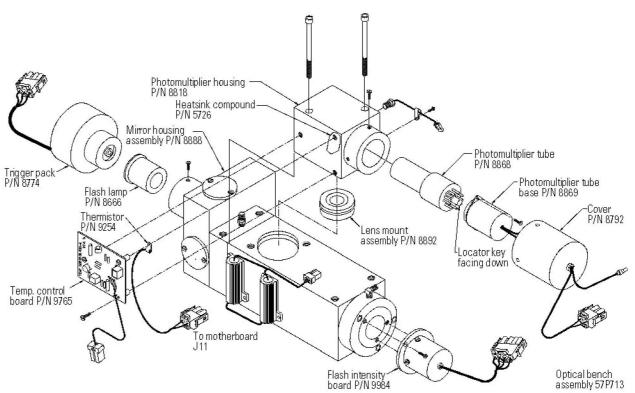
Optical bench assembly exploded diagram, PN TE-57P713-1
